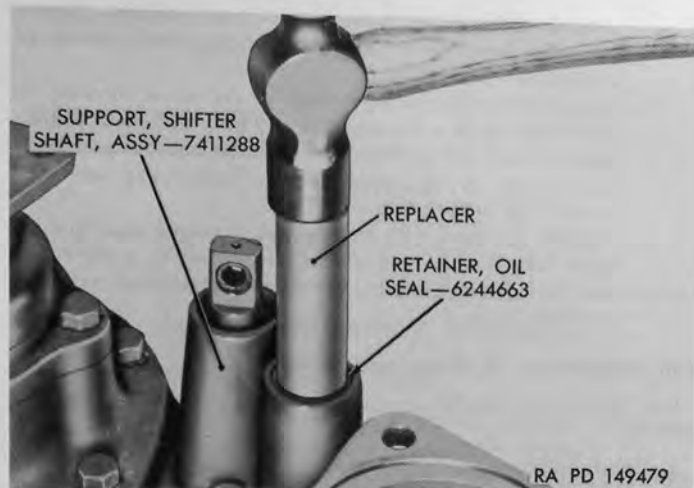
Use of shifter shaft oil seal replacer 41-R-2394-115 to install oil seal retainers.
